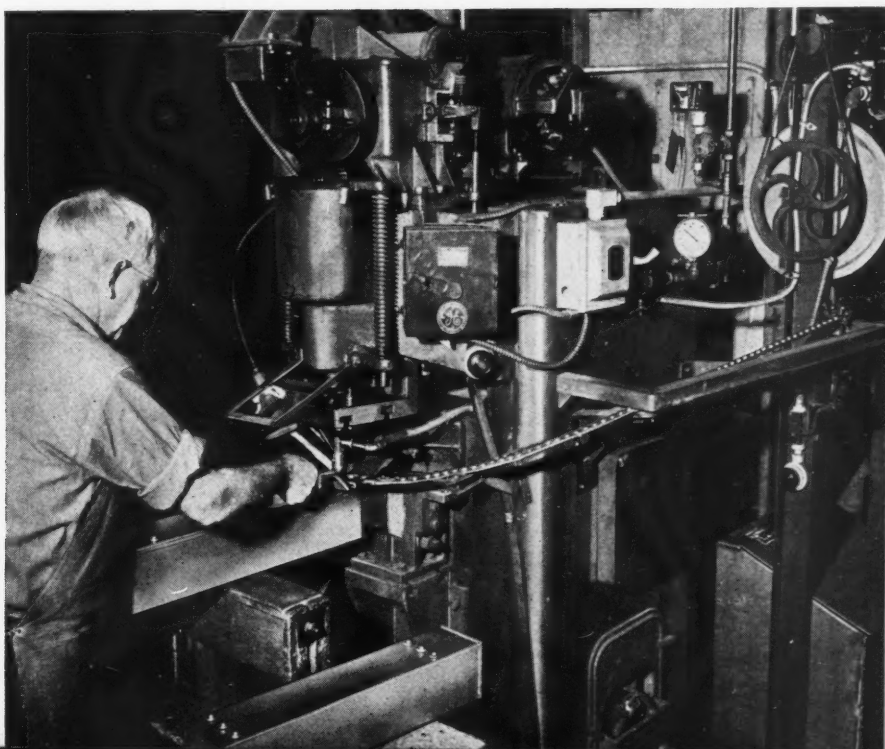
Vertical broaching machines are employed to produce two flats simultaneously on one end of cold-rolled steel terminal poles
